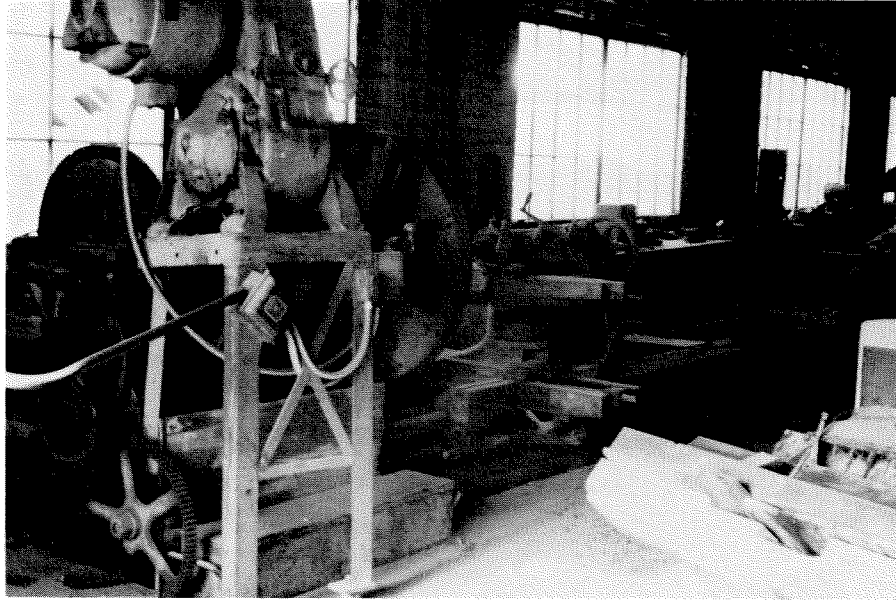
Heavy lathe at Brown's contracting yard on Glenoaks Avenue southeast of Hubbard Avenue. This heavy metal working lathe moved about 9 ft, relative to the floor, in a northerly direction, leaving a straight skid mark.
